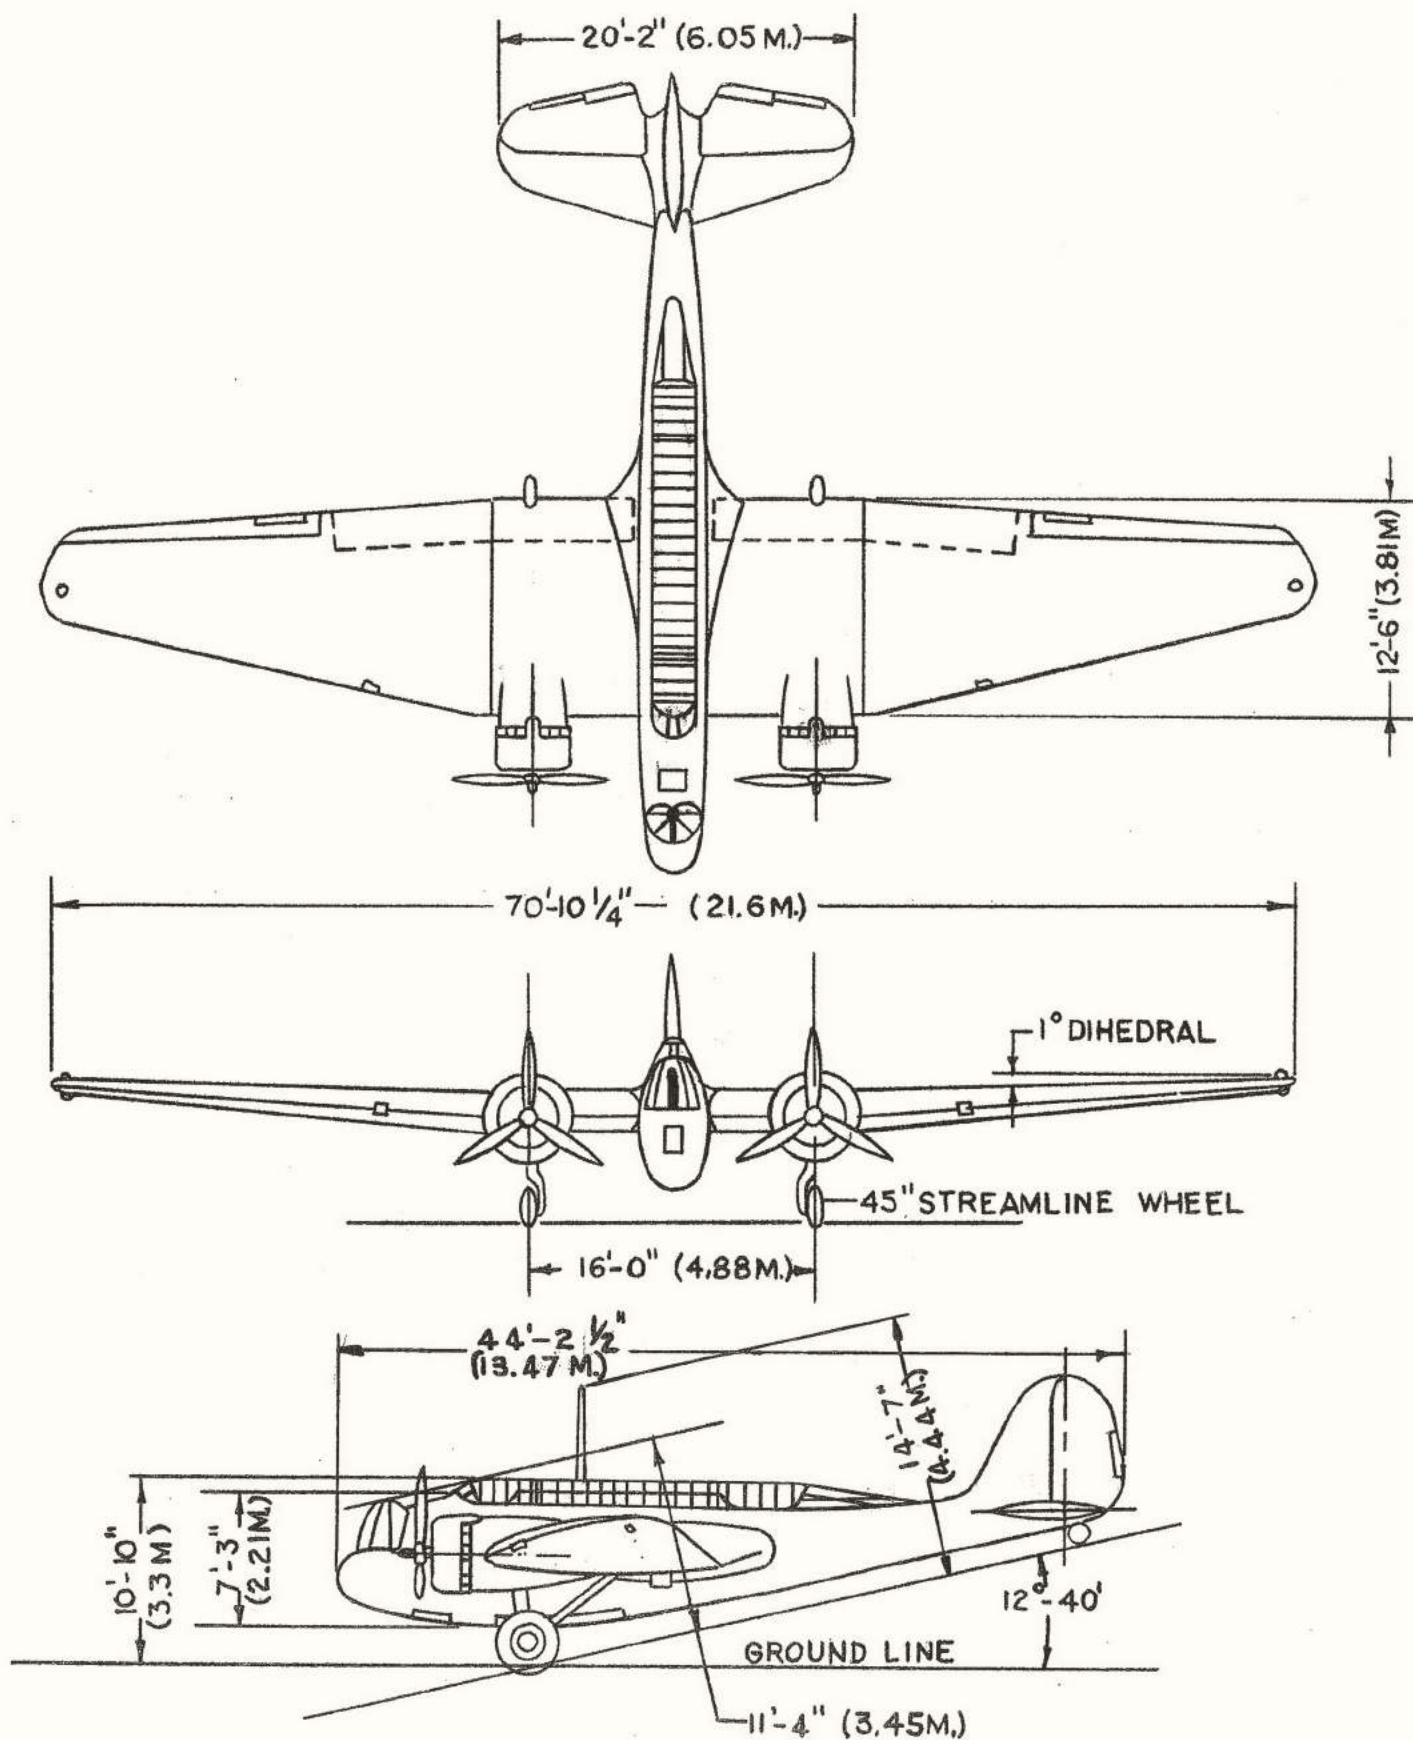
A AIRPLANE - 3 VIEW DRAWING
